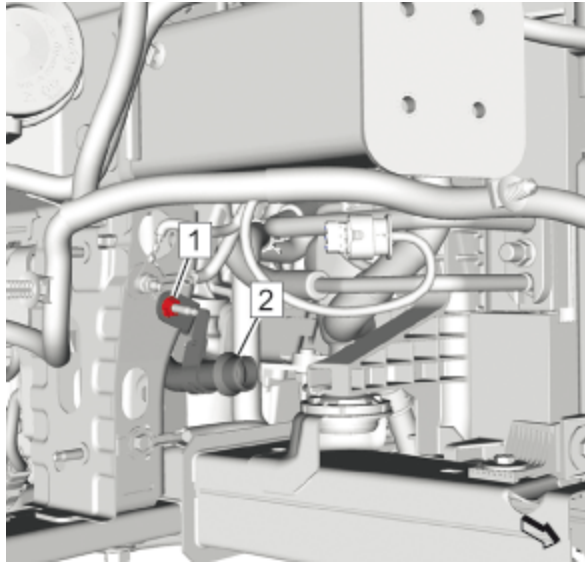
Drive Motor Battery Coolant Cooler Inlet Hose Nut
